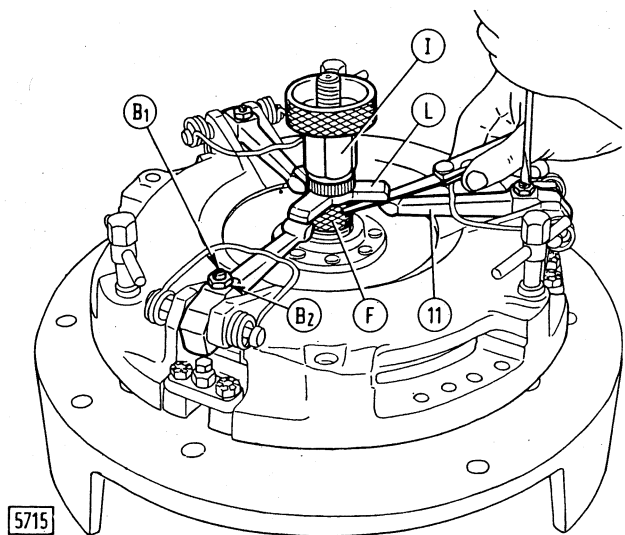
Adjusting the complanarity of the 10" clutch release lever complanarity on the universal fixture A 711063/68 B.
